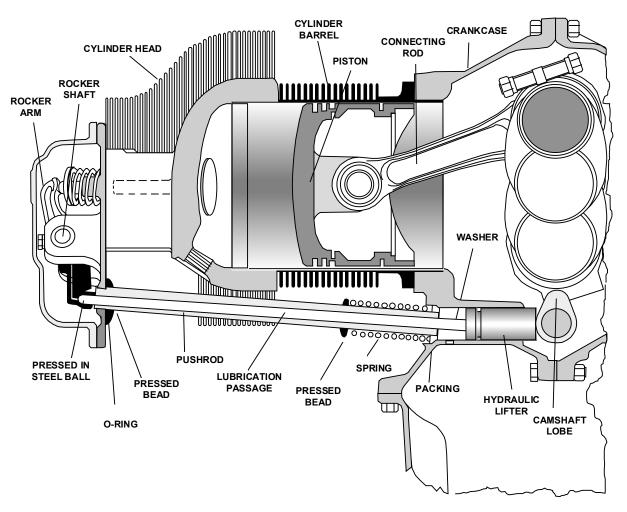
Engine Cutaway Detailing Cylinder Assembly
